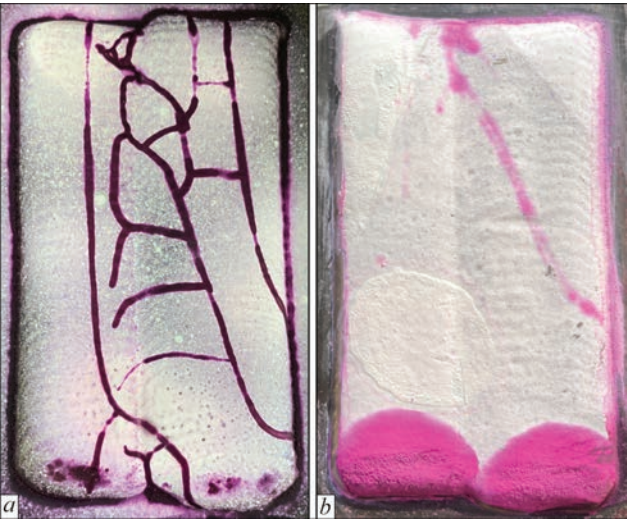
Cracks in deposited compositions: *a* — 08Kh18N9 + tungsten carbides; *b* — 220Kh18F7N3M2 + tungsten carbides
